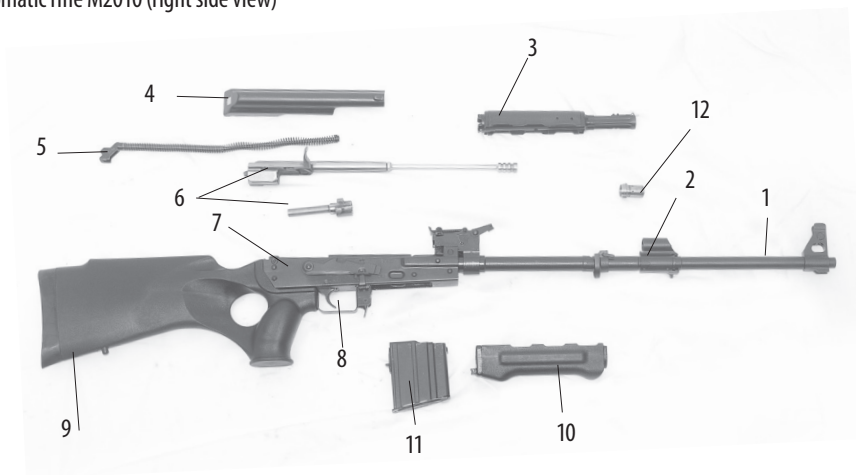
Parts of semiautomatic rifle: 1-barrel, 2- gas block, 3-gas tube with upper hand guard, 4-cover, 5-recoil mechanism, 6- bolt carrier with bolt, 7-receiver, 8-trigger mechanism, 9-stock, 10-lower hand guard, 11-magazine, 12-gas flow regulator
